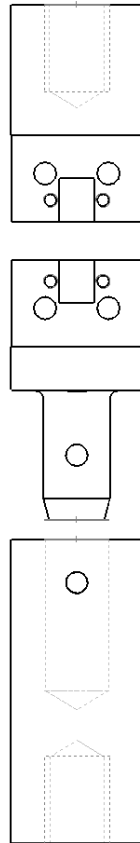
Rendering of fixture-adaptor assembly created using Solid-Works.
